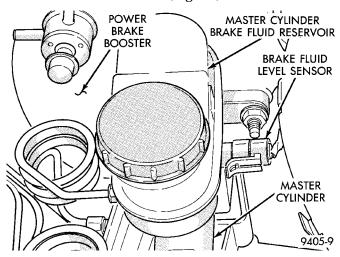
Master Cylinder Brake Fluid Level Sensor
